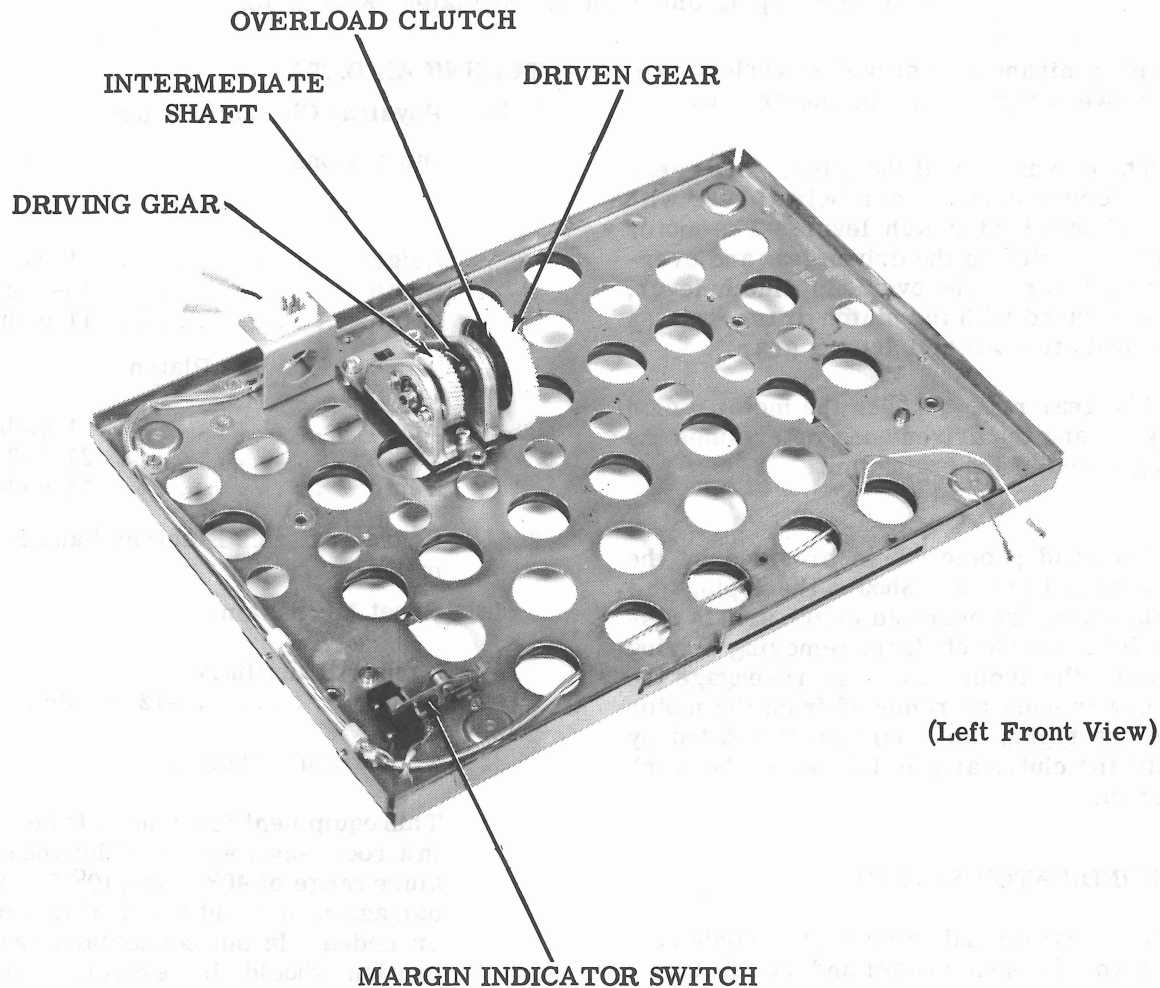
Base With Intermediate Gear Assembly and Margin Indicator Switch
